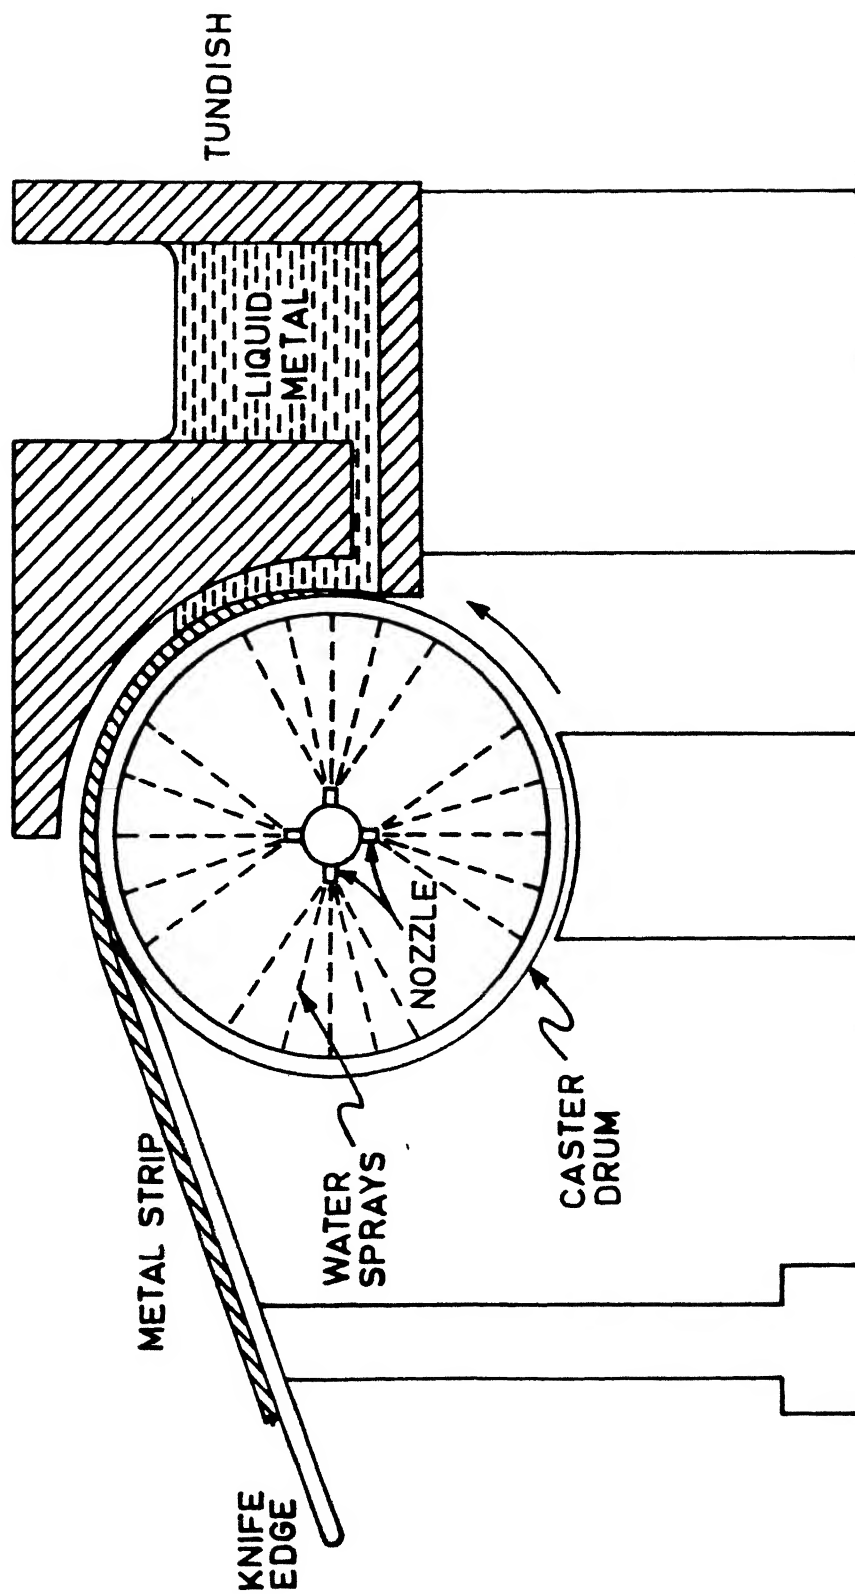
Schematic sketch of the Single Roll (drum) Horizontal Strip Caster
